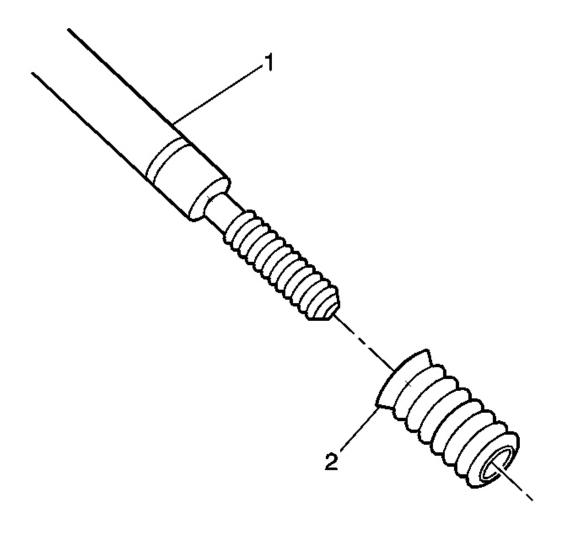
View of Bushing Type Insert Courtesy of GENERAL MOTORS CORP.
